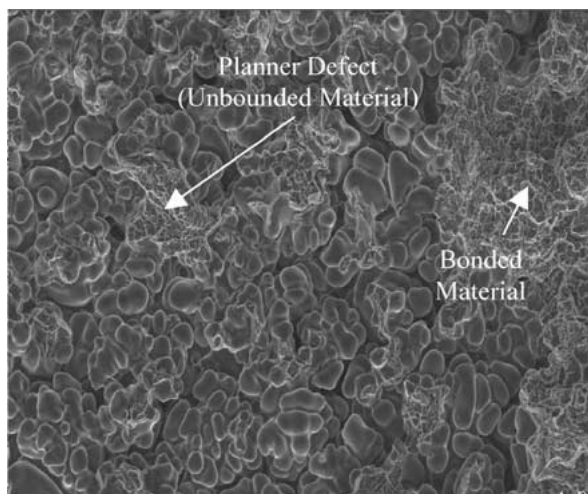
SEM photofractograph of the typical fracture surface of a 40 min. brazed joint with a joint thickness of 0.00 mm showing bonded and unbonded regions.
